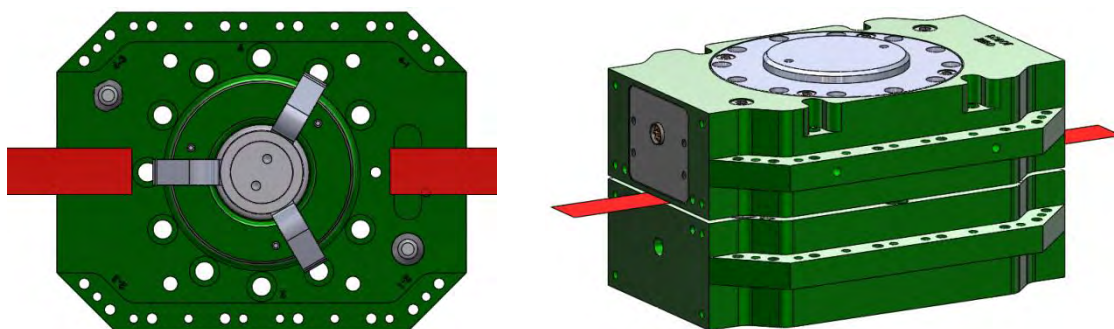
Shim Test of the Cam Locking Mechanism
